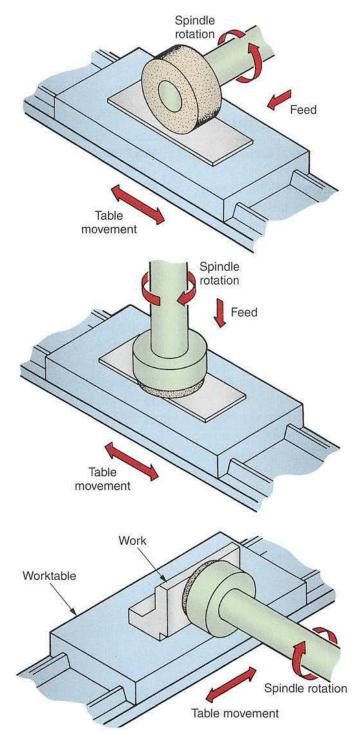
A grinding wheel removes material in the same manner as a milling cutter, but the chips of metal removed are much smaller.
